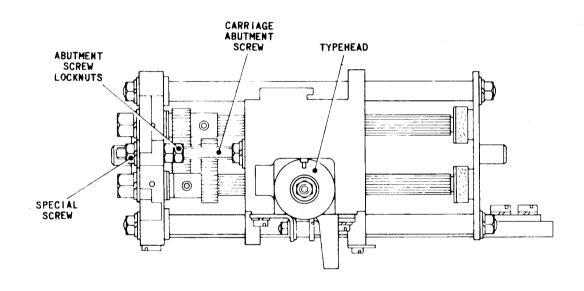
TYPEHEAD CARRIAGE MECHANISM
